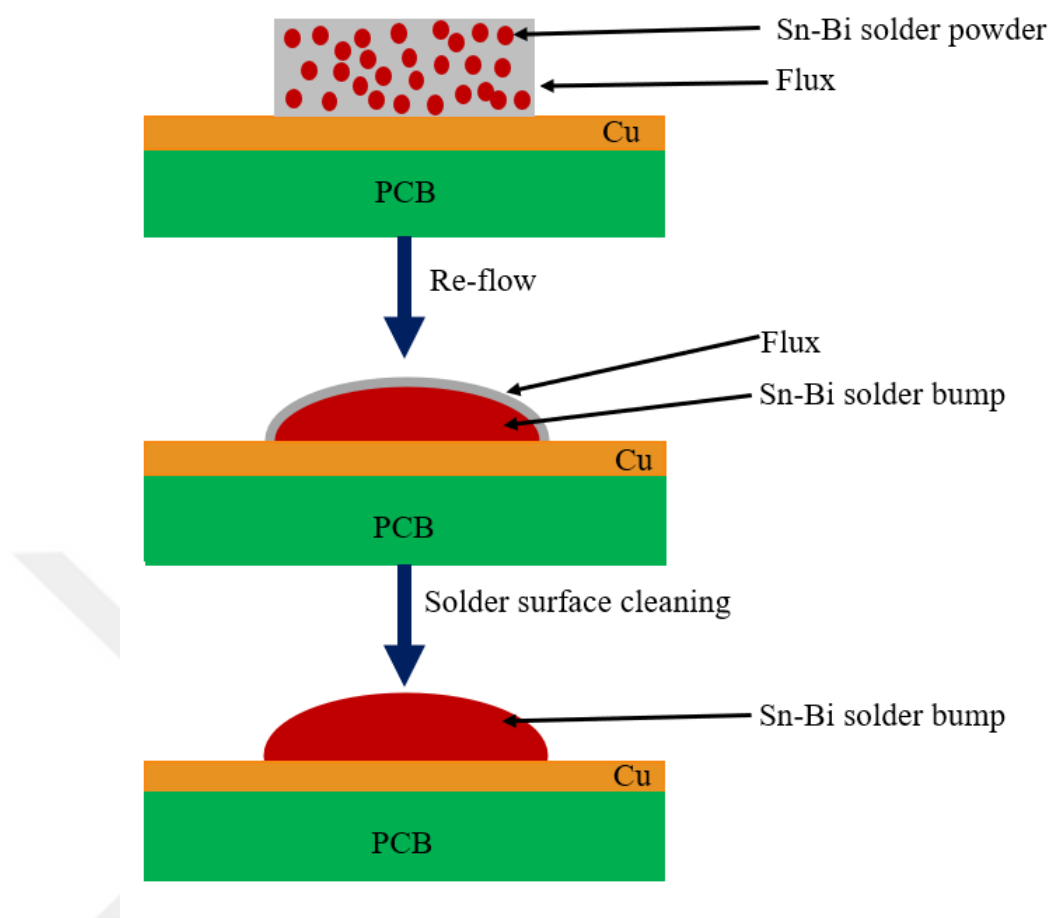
Schematic of flux-only Sn-Bi solder after soldering
